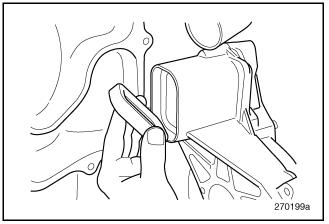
Cooling Duct Cover-to-Pump Base Plate Seal
